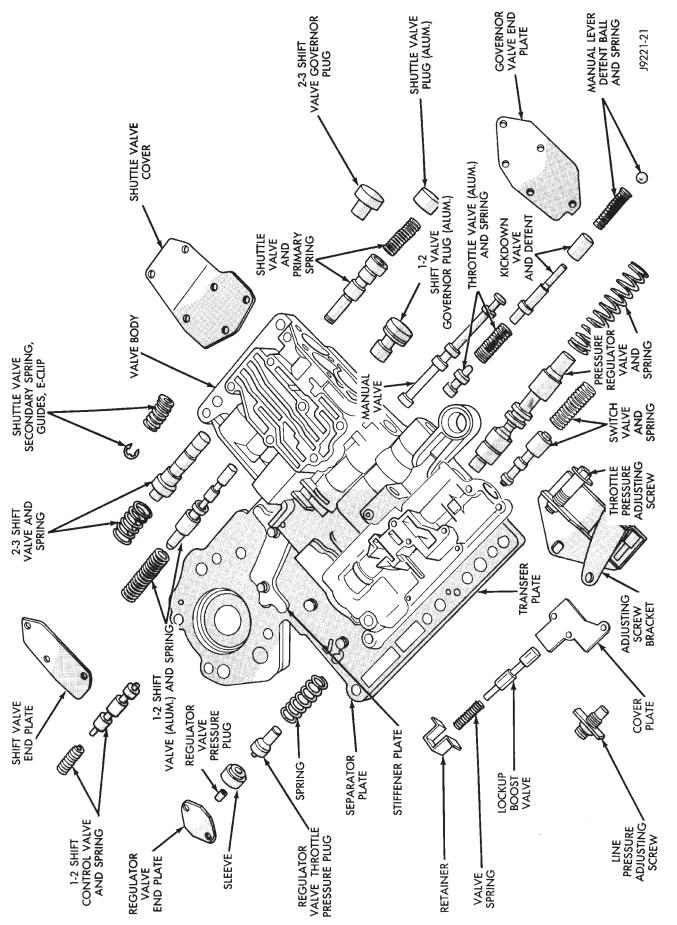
Upper Housing Components—46RH Valve Body (Alum. Indicates Aluminum Part)
